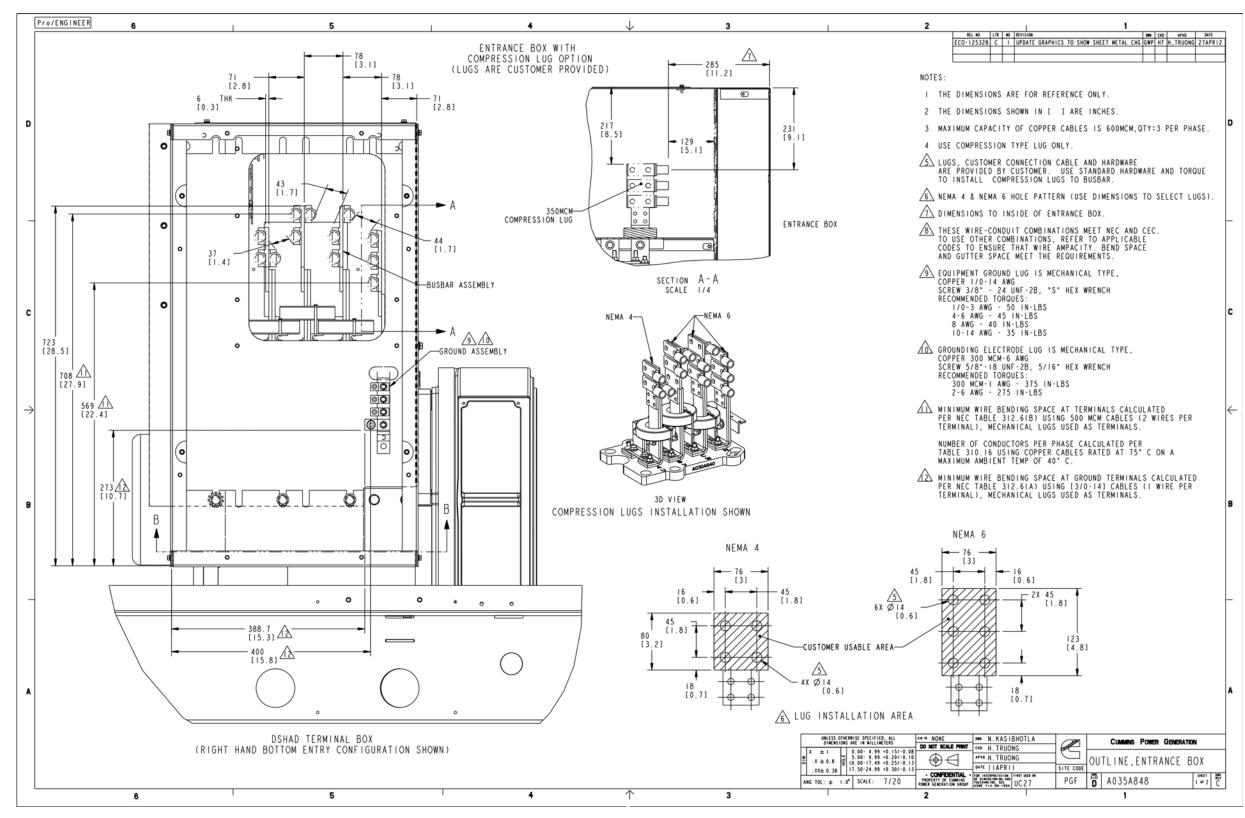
OUTLINE DRAWING - GENERATOR SET OPTIONS (SHEET 1 OF 1)
